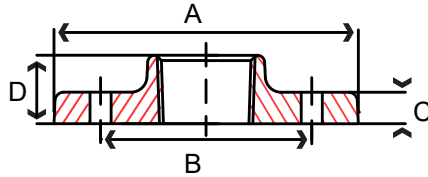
TH1 & 18TH1 – 150 lb. Threaded Companion Flange
